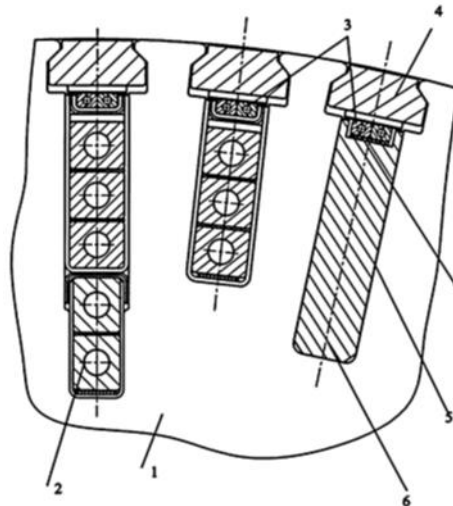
Sectional View of the Rotor of the T3B Turbine Generator in the Slot-embedded Part.
